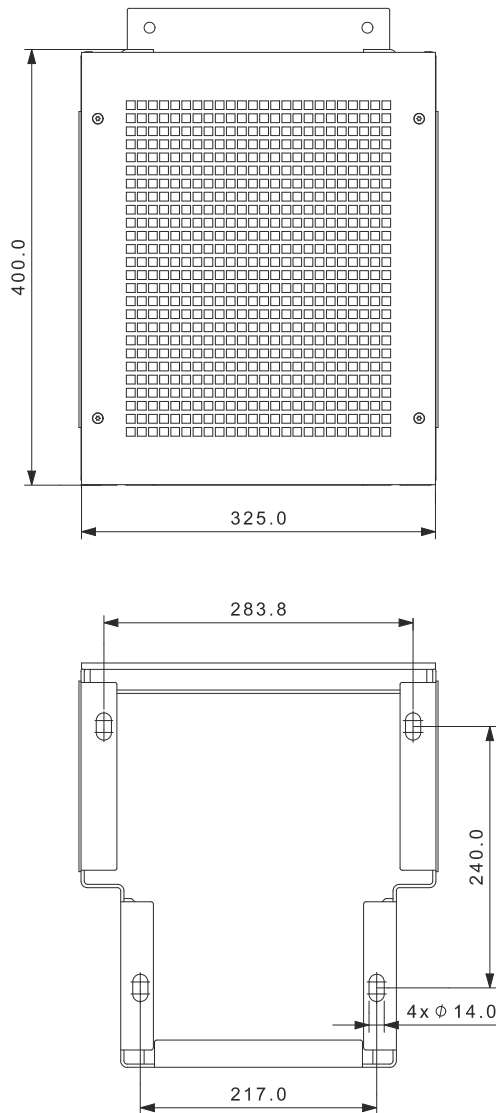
CUE enclosure D1h or D2h on a pedestal
